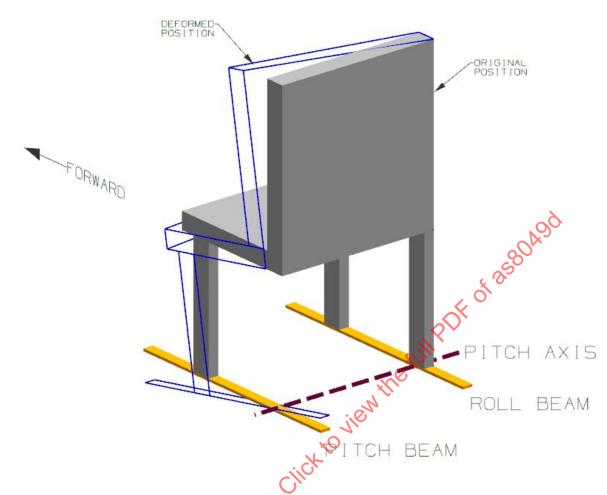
F - Schematic of floor deformation: single floor attachment on pitch beam - pitch axis location
